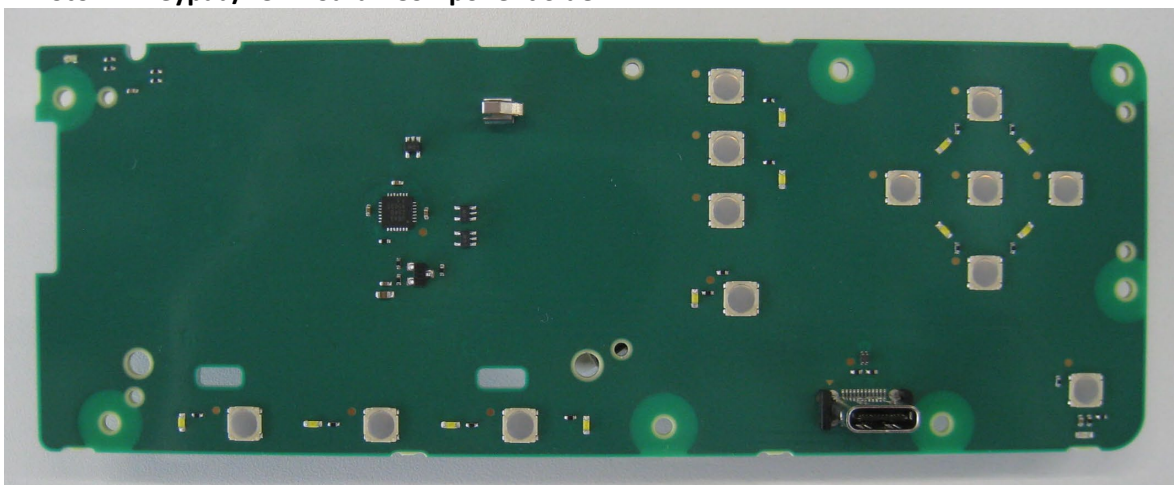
Keypad/LCD Board – Solder Side - BT/WiFi Module, Spring Contact for BT/WiFi Antenna
